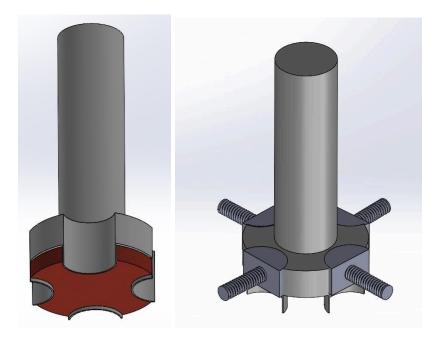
Razor 1-Step CAD model with and without shaping bolts
